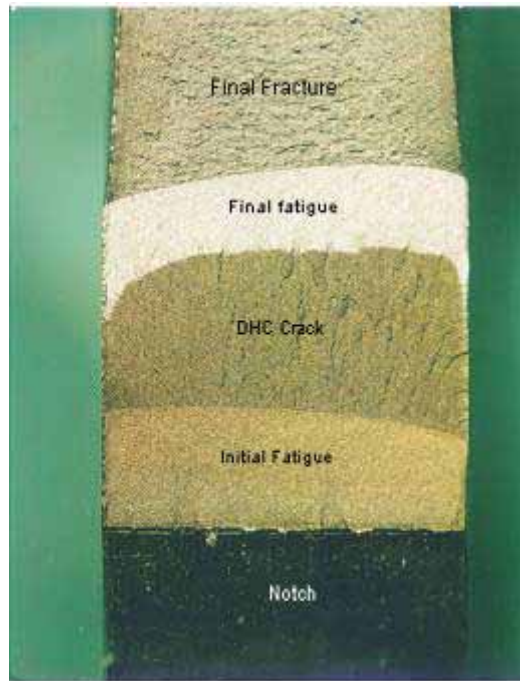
Typical fracture surface of Zr-2.5 Nb after DHC testing.
